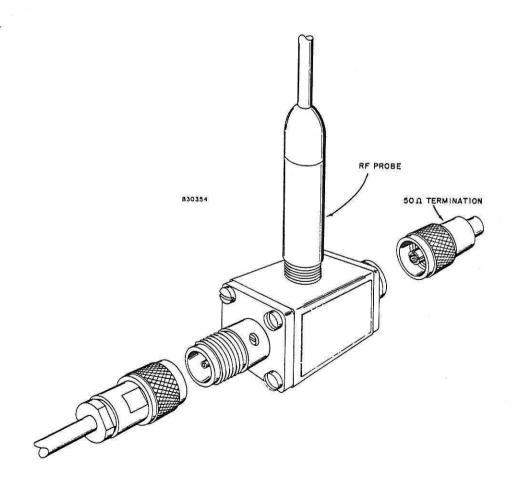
Assembly of Model 91-14A Type N Tee Adapter
